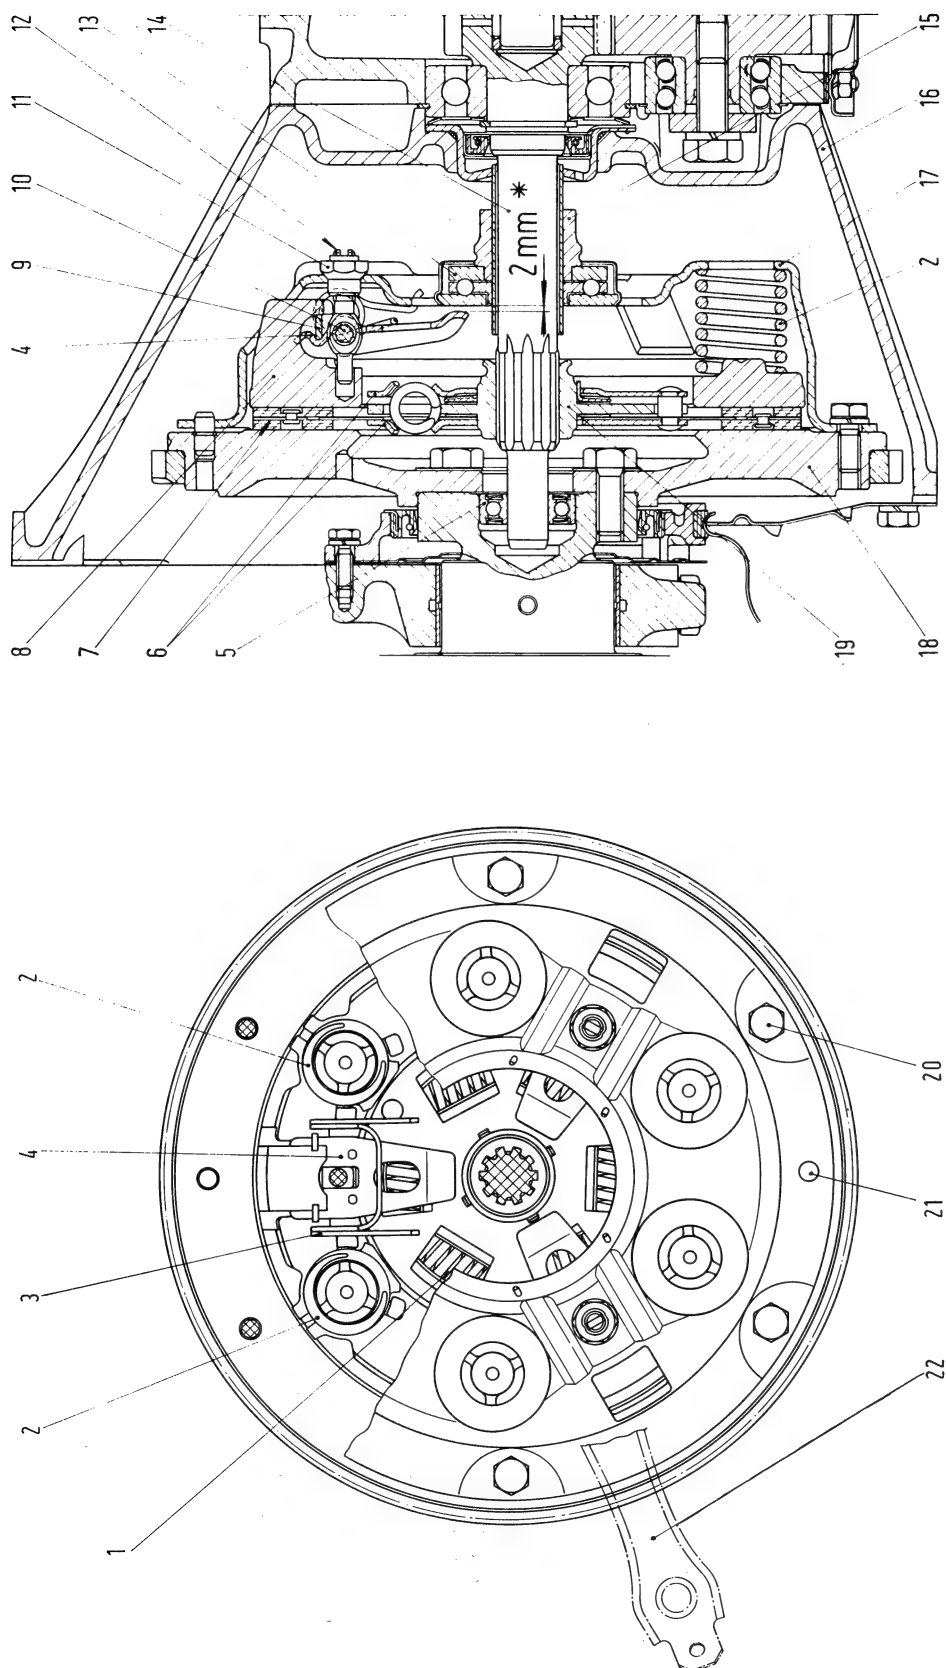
Clutch assembly: part sectional view across clutch cover and side section view.
